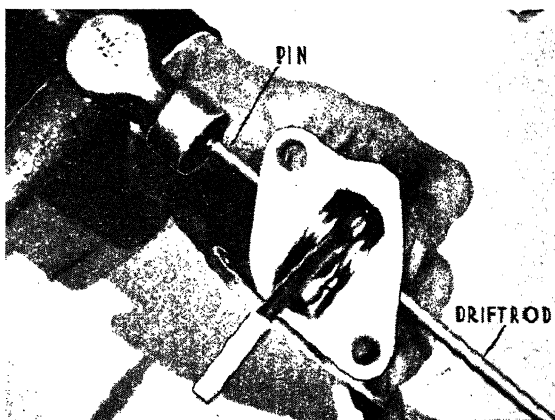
TO ASSEMBLE ROCKER ARM AND LINK ASSEMBLY (4)
